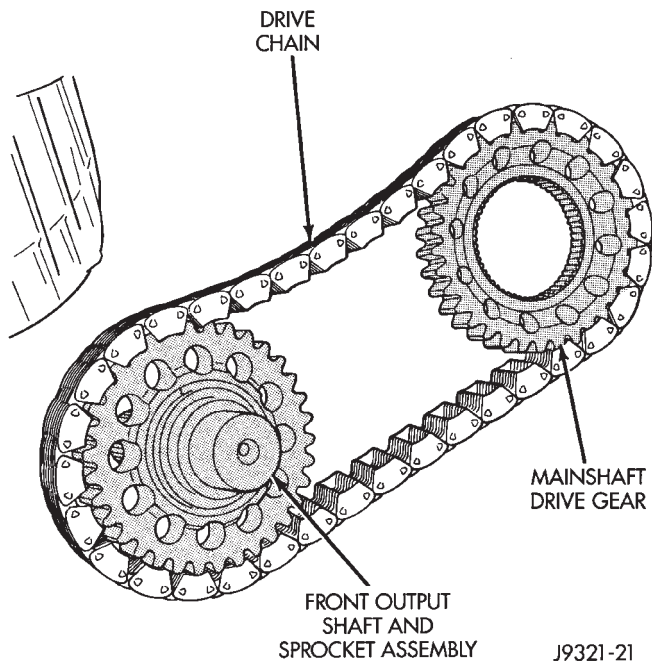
Front Output Shaft, Drive Gear And Chain Removal
